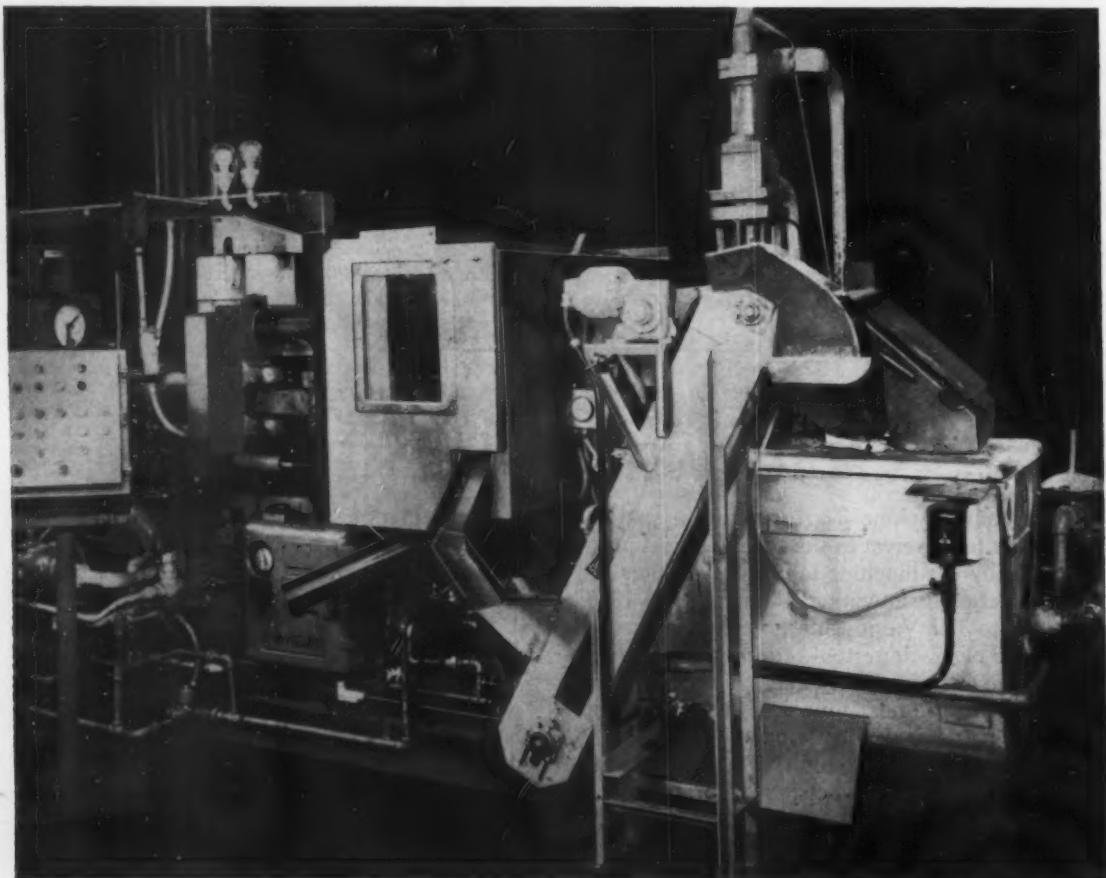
Fully mechanized Reed-Prentice die-casting machine. Castings slide down chutes through the guard. The gate is returned to the melting pot via the elevator conveyor on the right.
